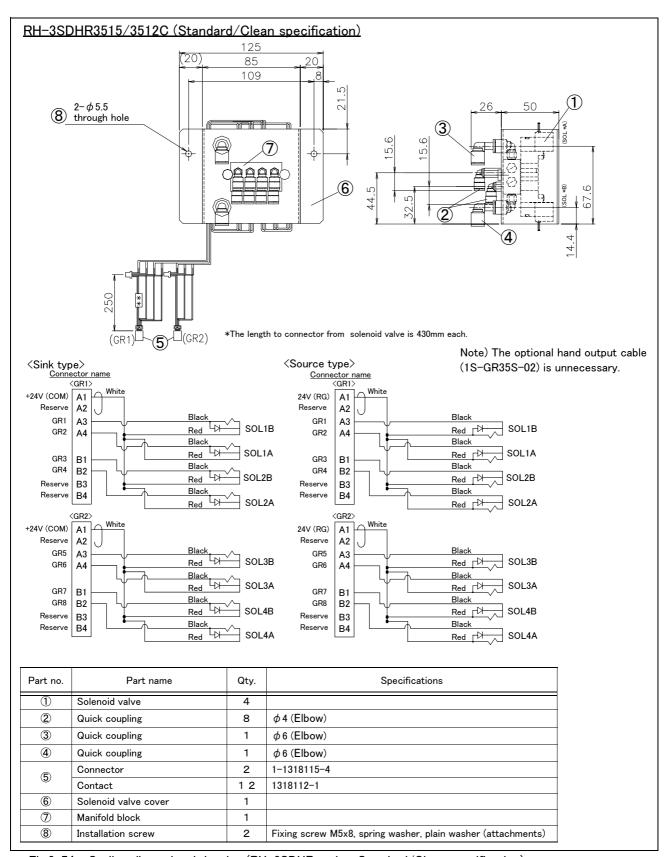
Outline dimensional drawing (RH-3SDHR series: Standard/Clean specification)
